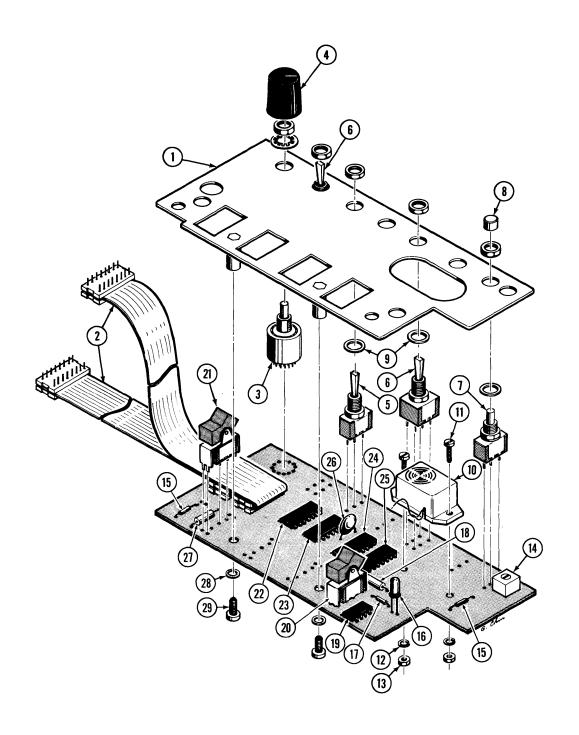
23710 CONTROL PANEL ASSEMBLY
